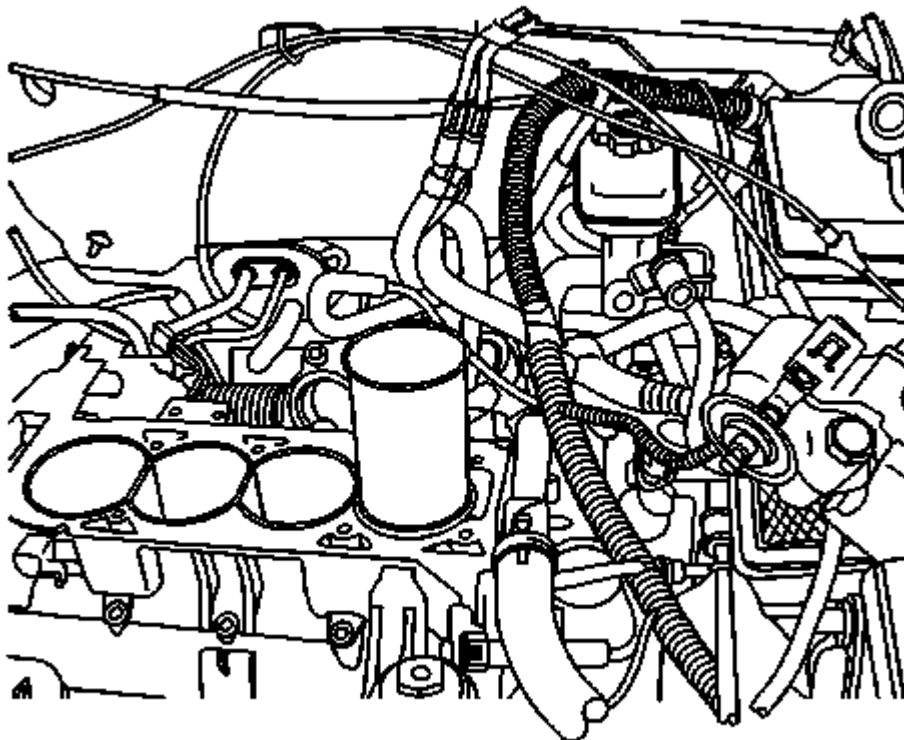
Removing Cylinder Bore Liner From The Engine Block
